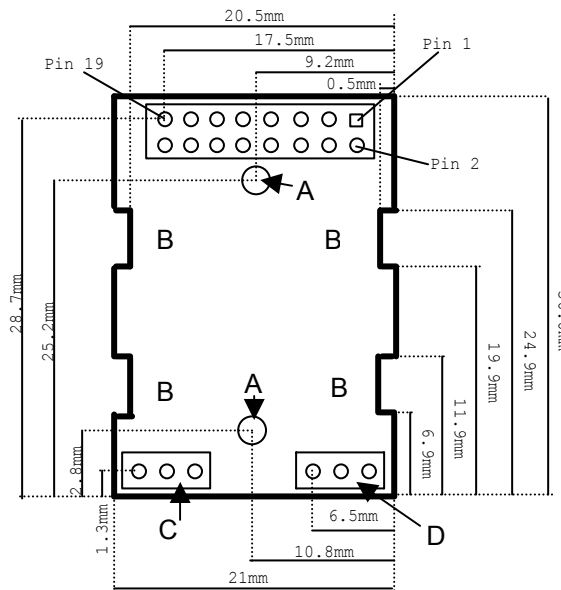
ZM1206 Z-Wave Module PCB outline (TOP VIEW)
